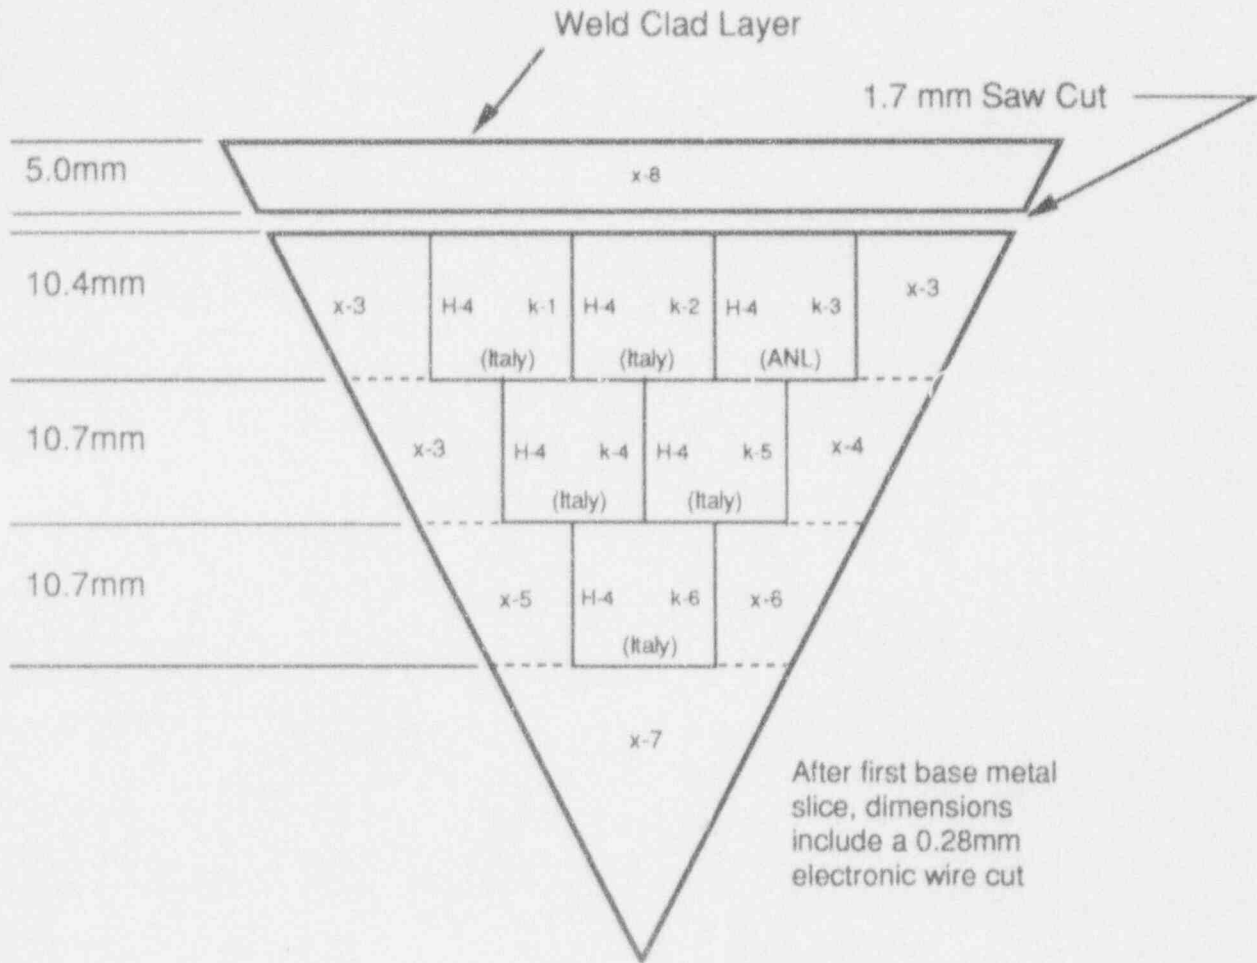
Locations of mechanical test specimens k1 through k6 cut from Sample H-4.
